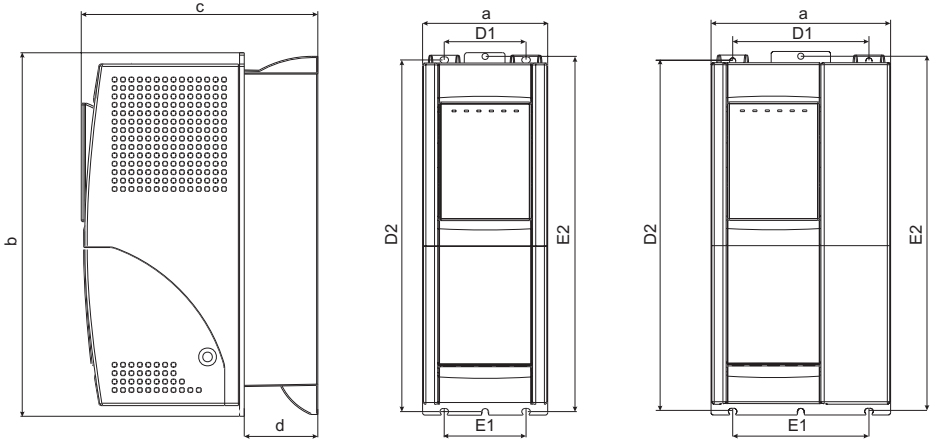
Mounting Methods (Sizes 1007 ... 3150)
